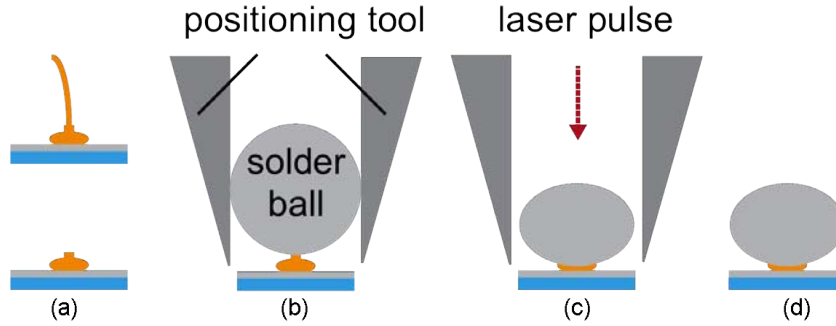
Key steps for solder jetting of fatigue specimen: (a) Removal of bond wire and degreasing ball bond surface with ethanol (b) a capillary tool clamping the solder sphere is positioned above the ball bond to be soldered. (c) Finally, a laser pulse is emitted leading to fast reflowing of the solder ball and the Cu ball. (d) shows a sketch of the prepared ball bond for fatigue testing.
